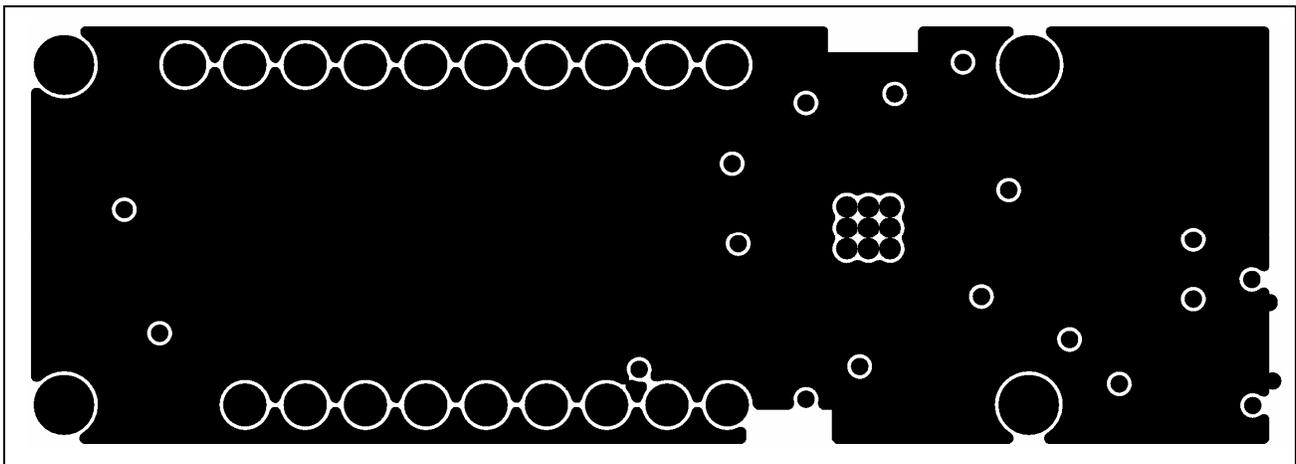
HFRD-2.0A PC Board Layout – Power Plane
